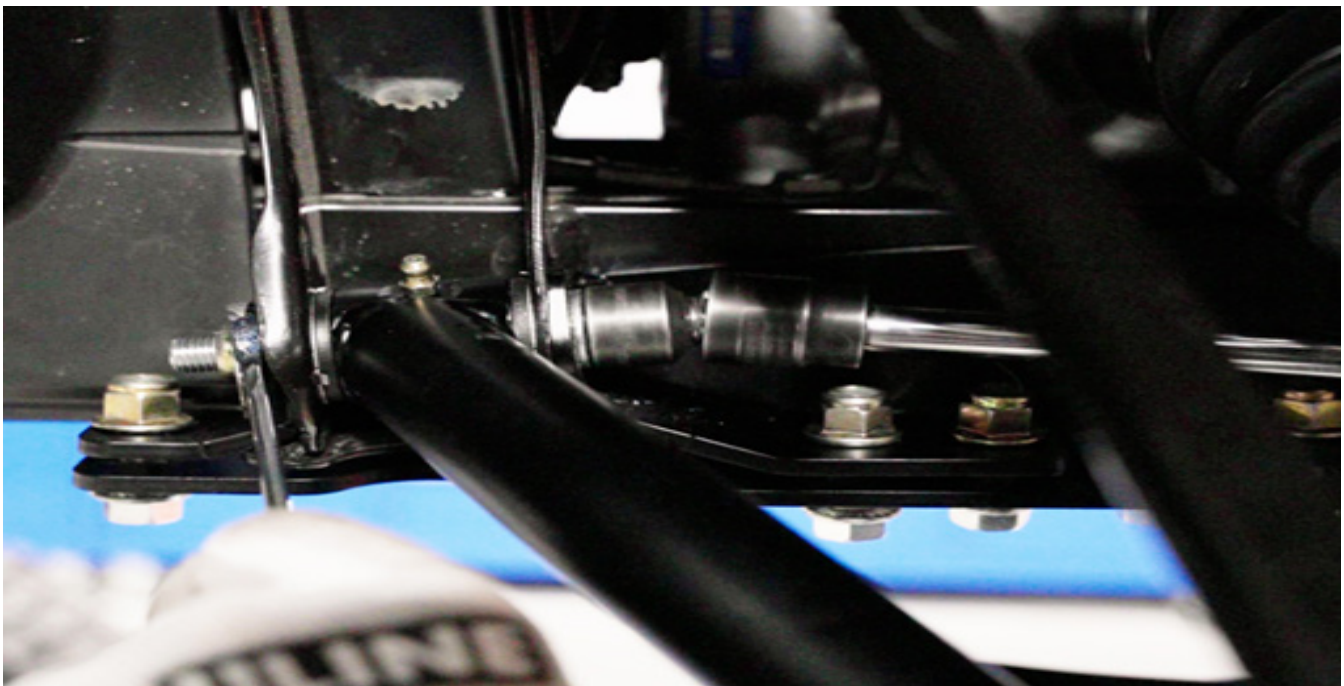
Install Rear Support using 15mm Socket and 15mm Wrench
